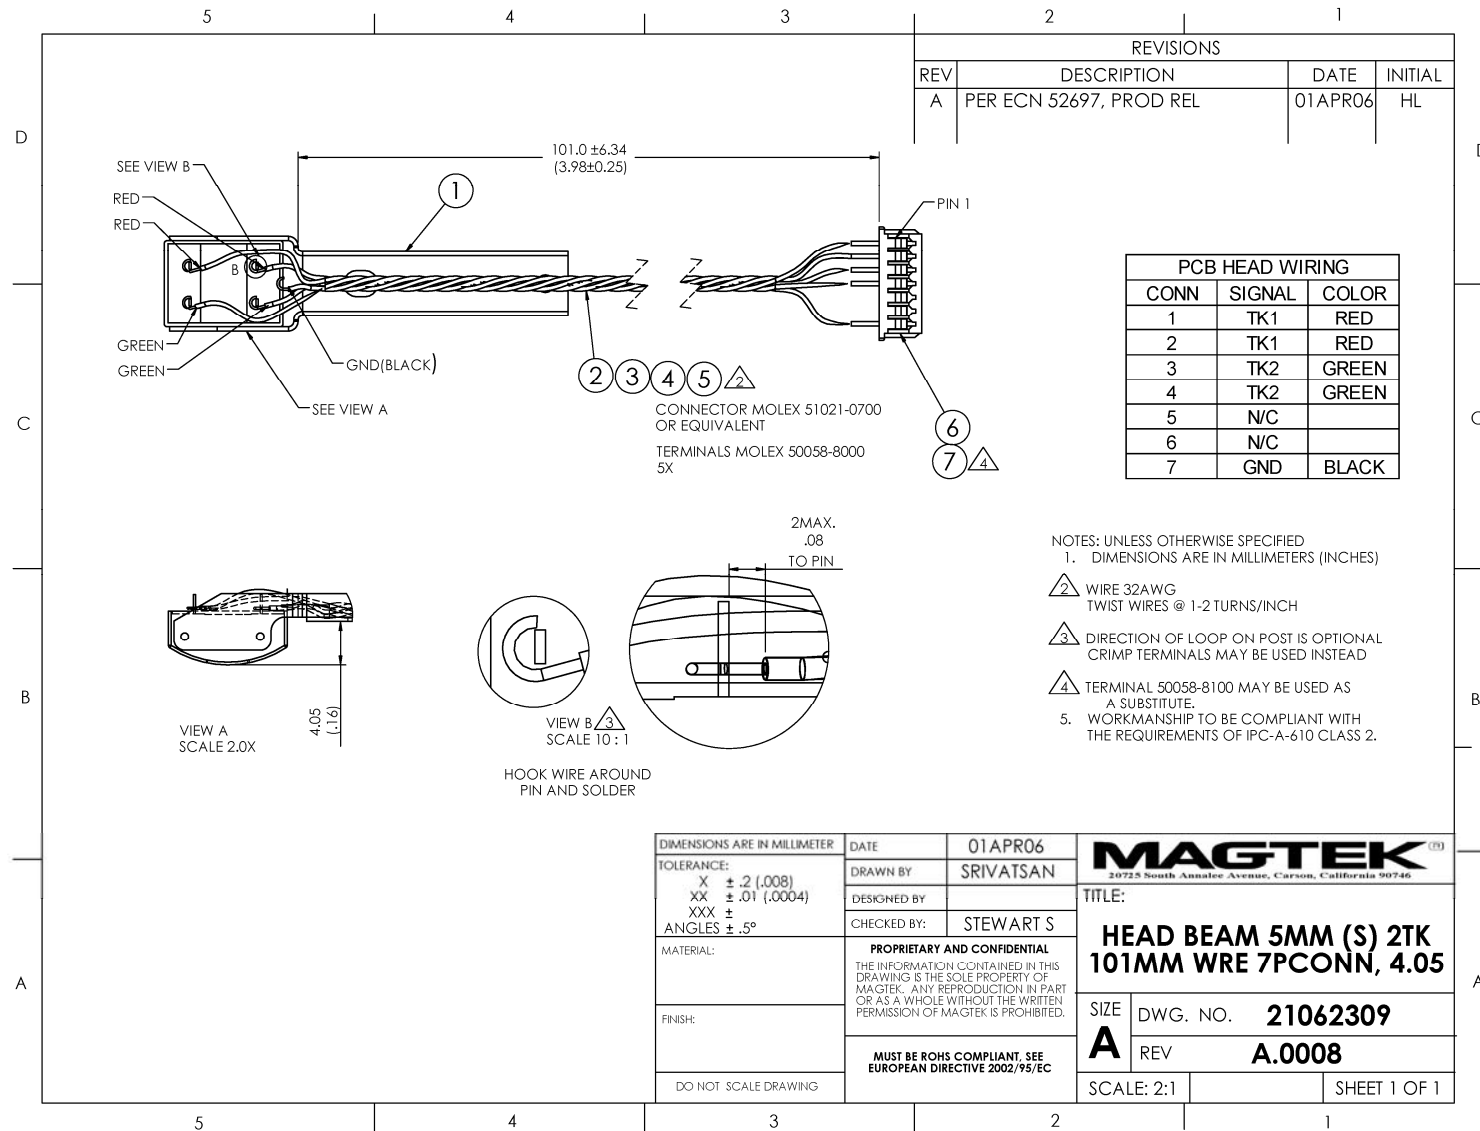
2-Track Read Head on Beam Assembly with Cable and 7-Pin Connector
